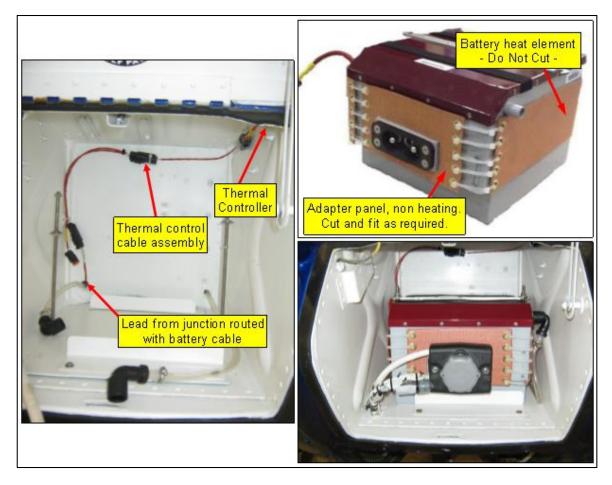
Battery heater installation. Control cable assembly located at rear of battery box, Thermal control TLP3046- located at top left of box secured with cable-ties and Click Bond cable anchors TU02782, refer to instructions TN03046 and TN02782. TBP2646-31-battery element and TB02645-07 adaptor panel fitted around battery. Adapter panel cut to fit around contact block, Do Not cut element. Use cable-ties or appropriate lacing and gently lace element and panel in place around perimeter of battery. Alternate tension between lacing and grommets. Be careful not to pull too hard, this could result in damage the element or in pulling grommets out.
